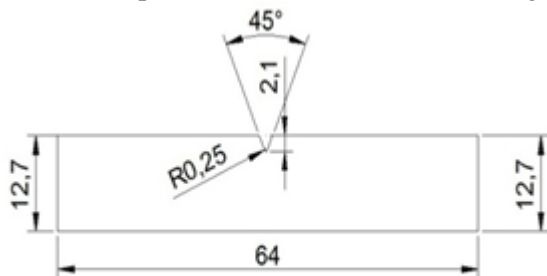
ASTM D 256 dimensions of the Izod impact test specimen.
